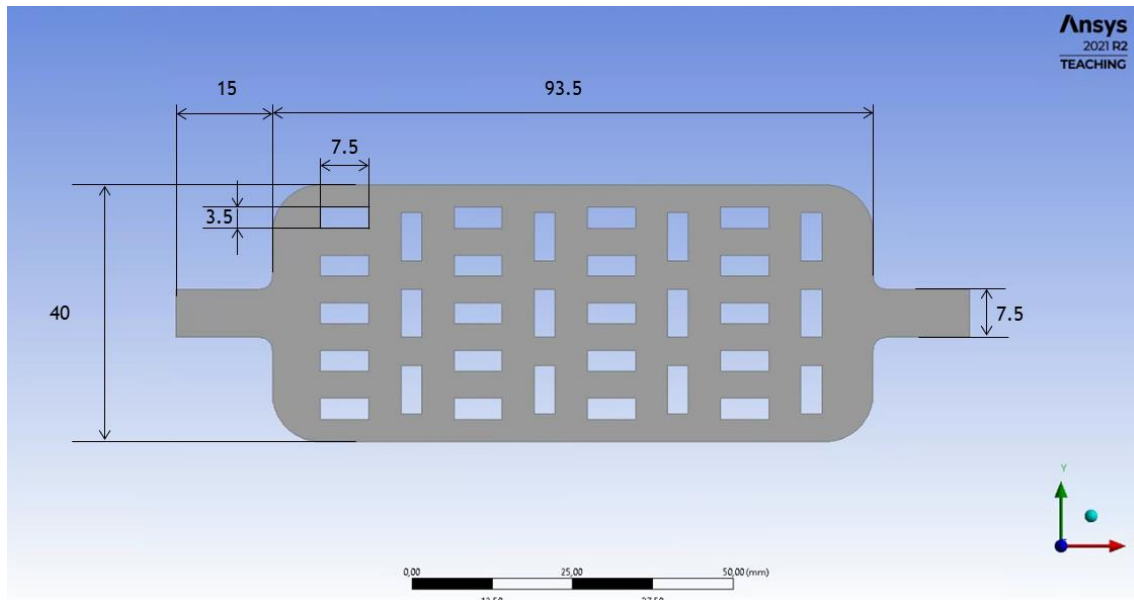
Geometry in DesignModeler and its dimensions in mm.
